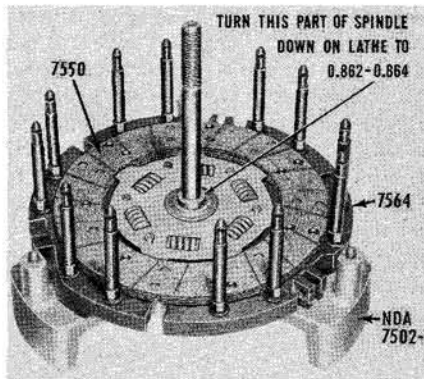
Use the fixture tool to properly align and adjust the double clutch during reassembly. Refer to text.
